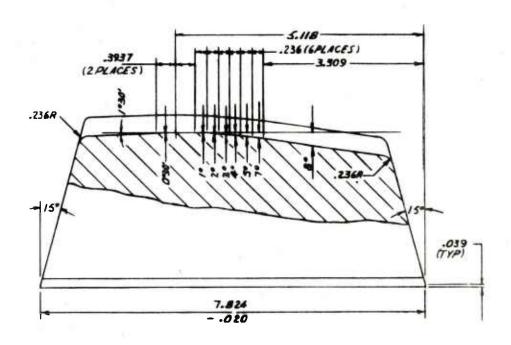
Rotary forging hammer - typical for 106mm I.D.
